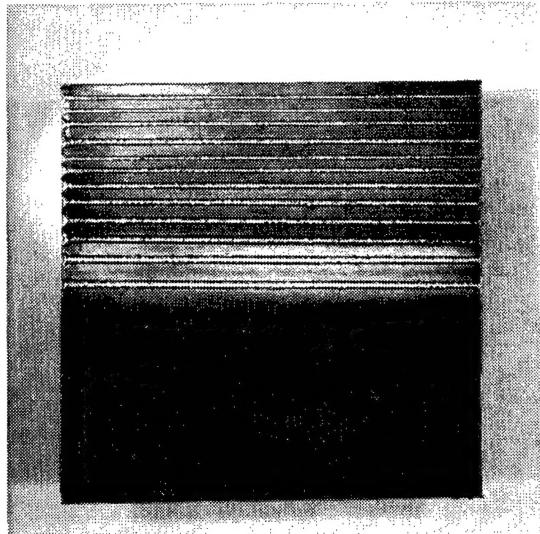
Typical bead-on-plate welds (1X); the welds are made from top to bottom.
